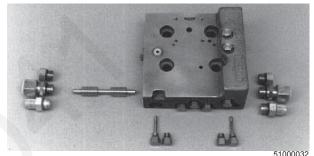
Multi-function Block With PCOR Defeat Spool Components
